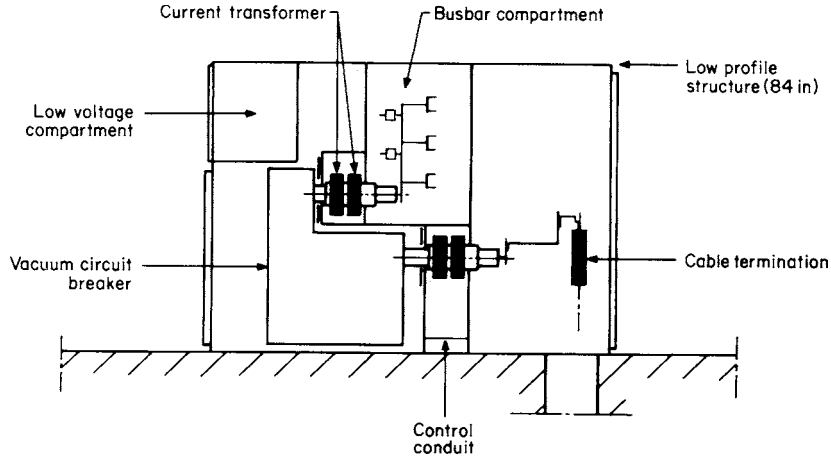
Side view of a 38-kV metal-clad switchgear unit with horizontal-drawout vacuum circuit breaker, type HKV, up to 3000 A, fan cooled, 22 kA.
